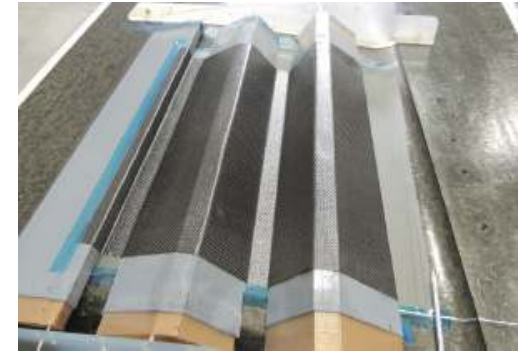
Aileron in-process lay-up and final configuration (vacuum bagging not shown).
